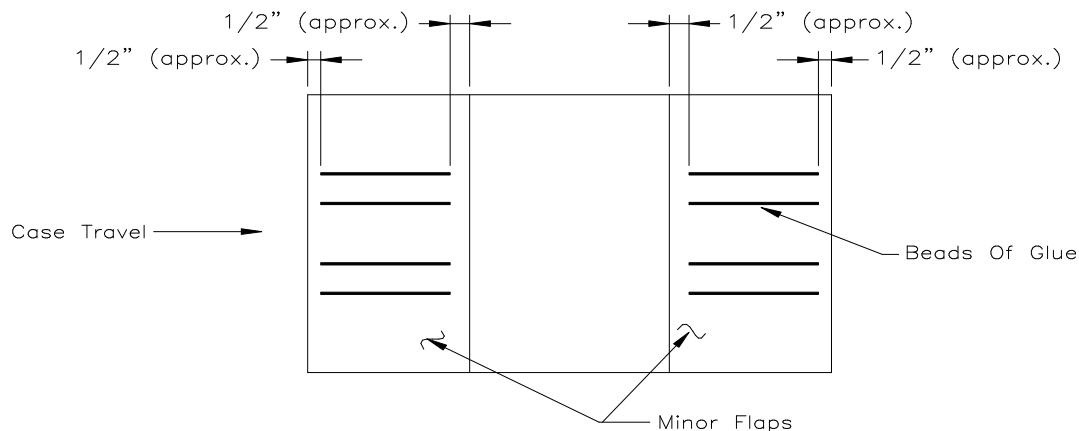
CHECKING GLUE PATTERN ON FLAPS
